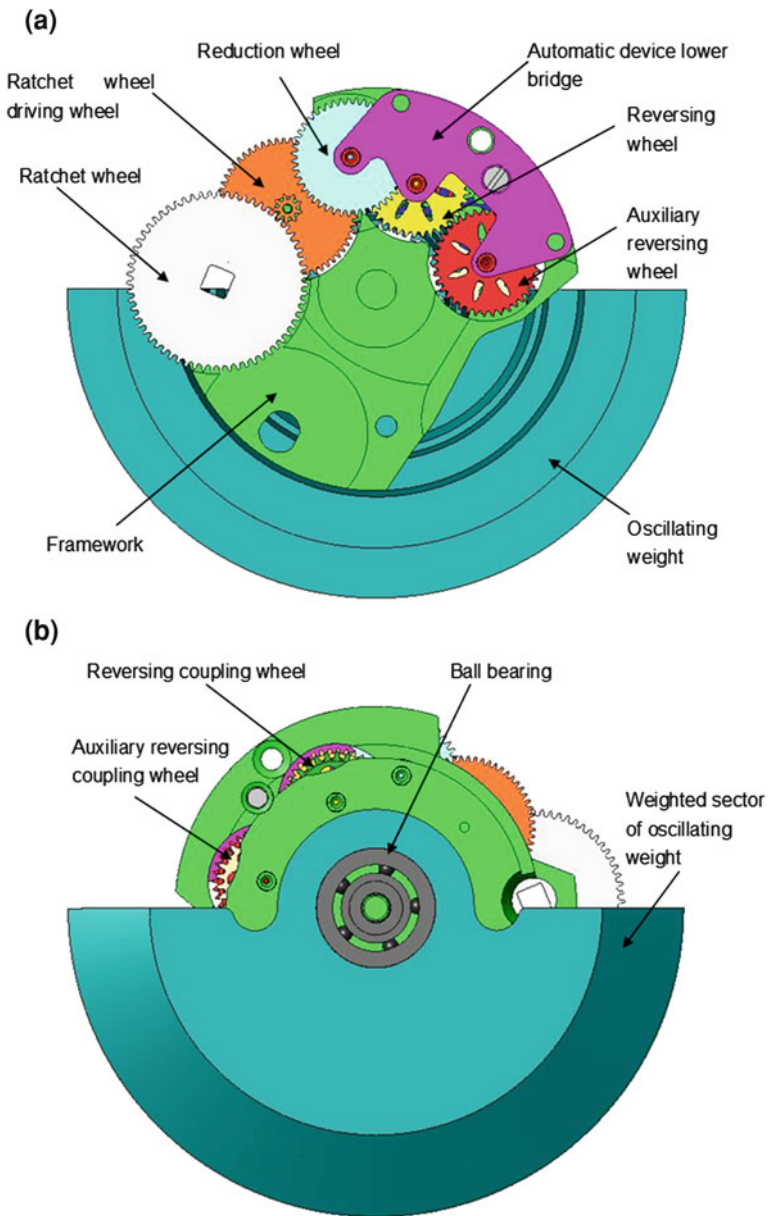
The CAD model of the automatic winding device. a The front view b The back view
